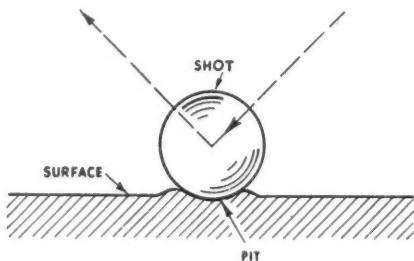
Drawing illustrating action which takes place when metal surface is hit with shot.
